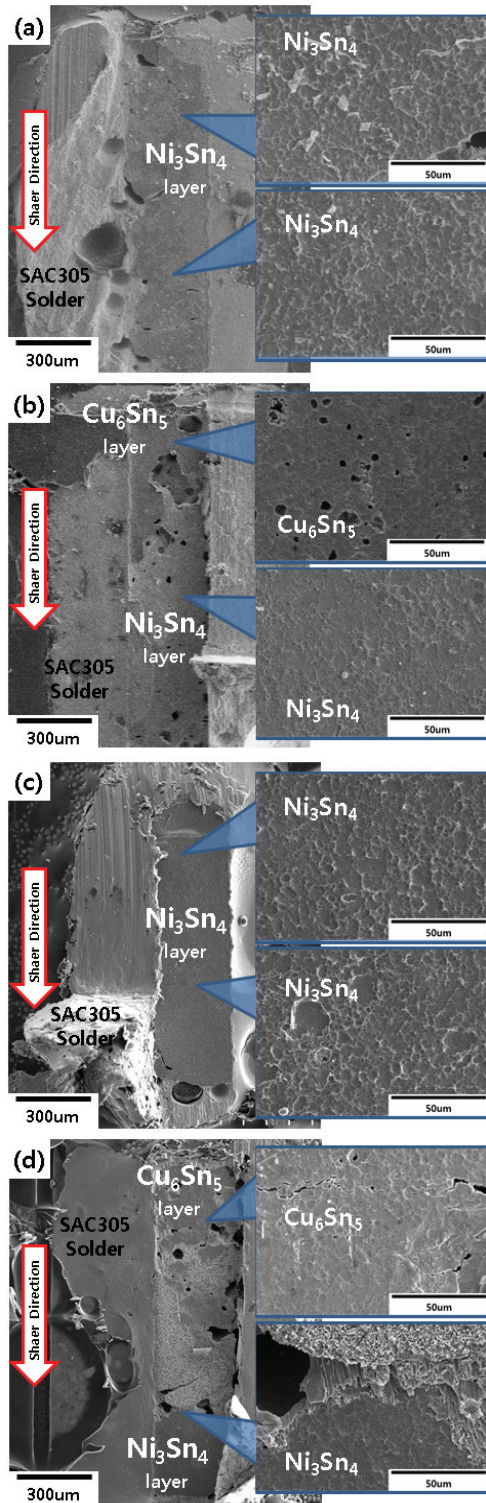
Fracture surface of SAC305 and SAC305 epoxy solder joint (a) before the ageing test in plain solder joint, (b) after the ageing test in plain solder joint, (c) before the ageing test in epoxy solder joint, and (d) after the ageing test in epoxy solder joint.
